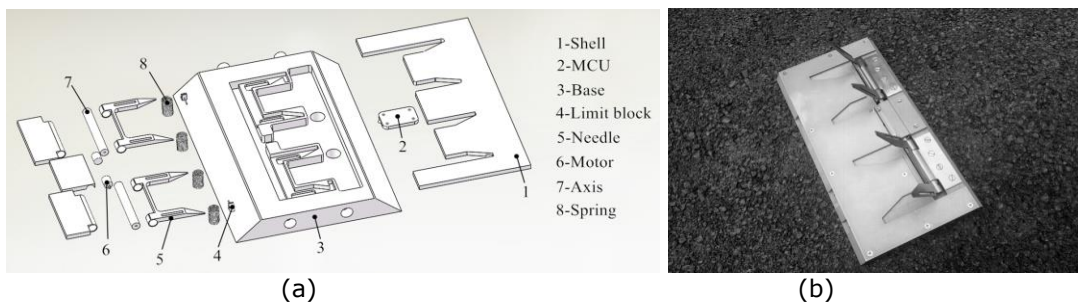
New tire breaker: (a) The explosion figure, (b) The prototype.
